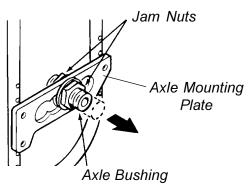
ADJUSTING WHEELBASE WIDTH
